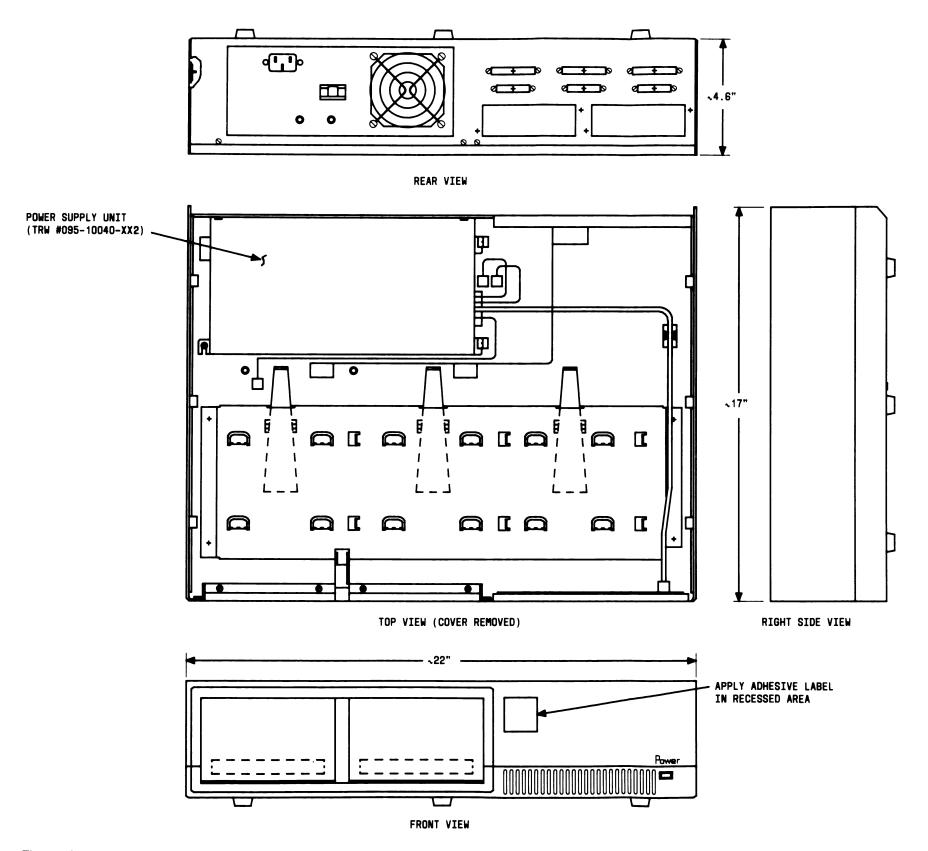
International AT&T/XM Cabinet Assembly Drawing (ED-4C635-30)
